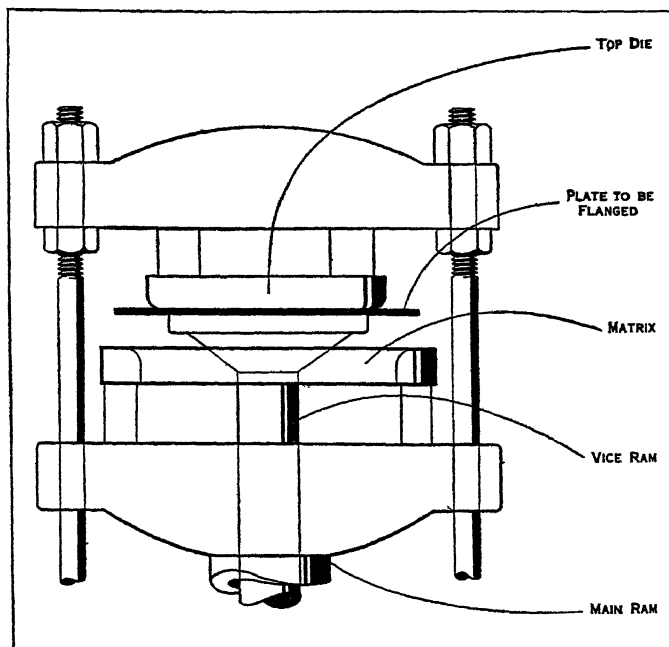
FLANGING A BOILER END IN HYDRAULIC PRESS
